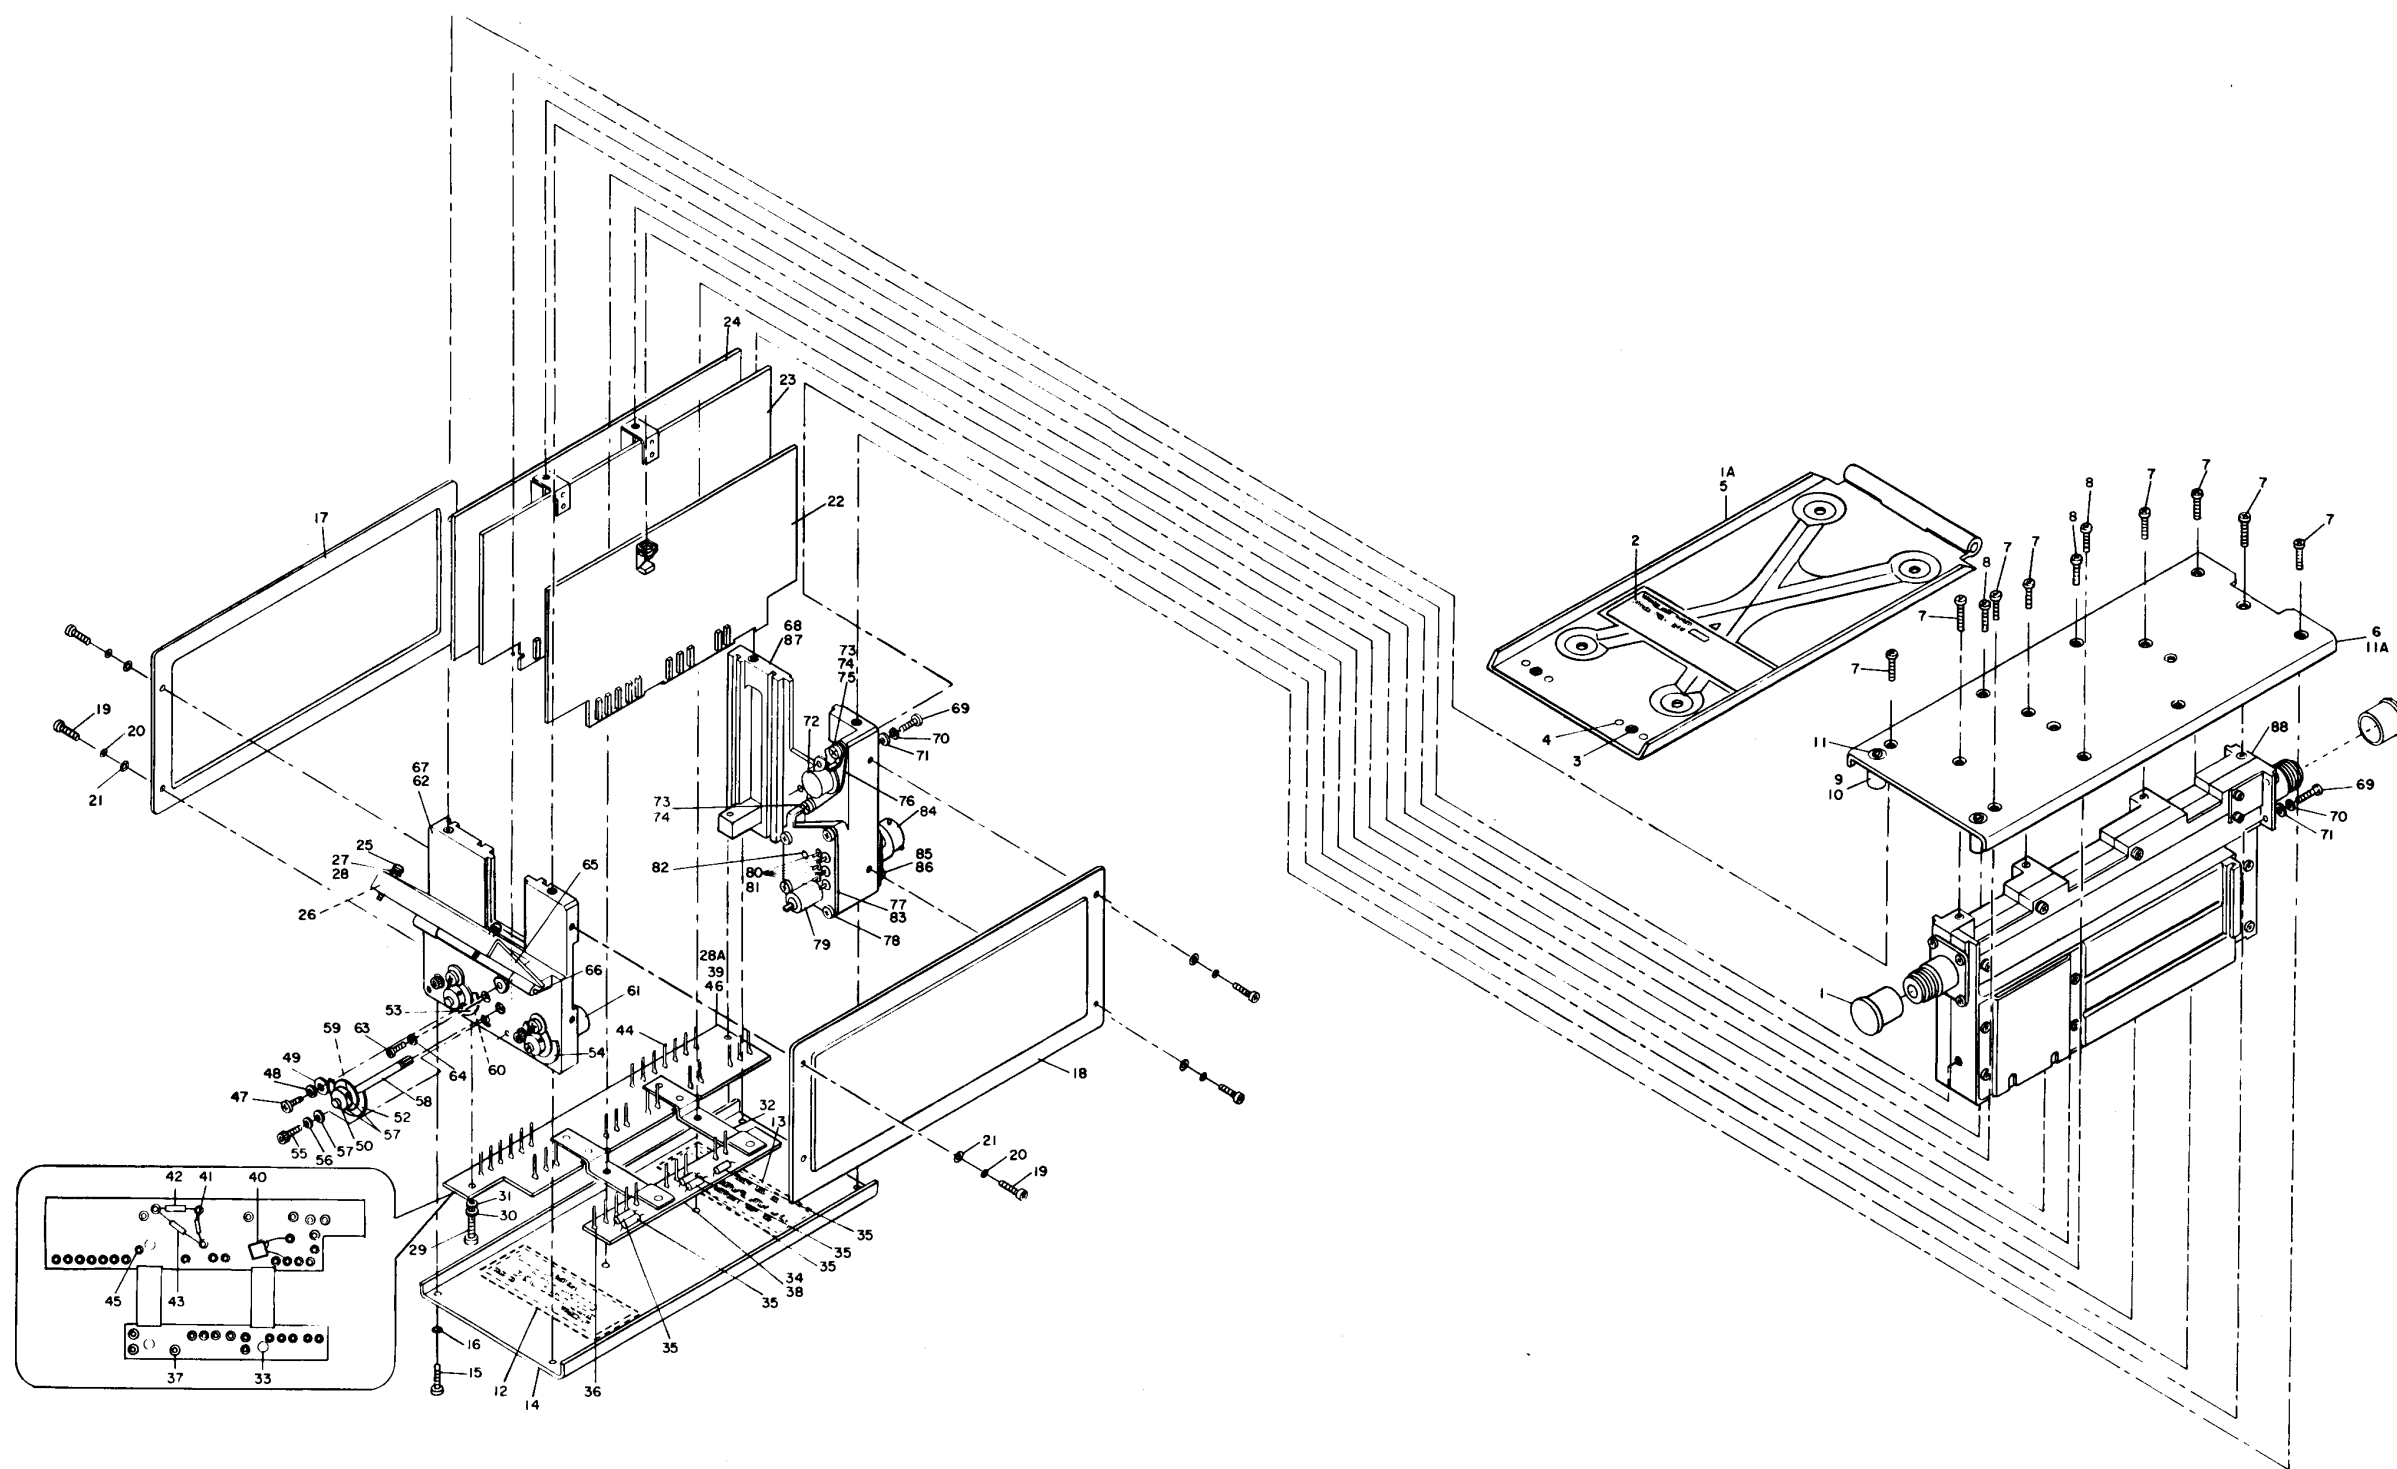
Test Set, Transponder Set TS-1843A/APX, Exploded View
